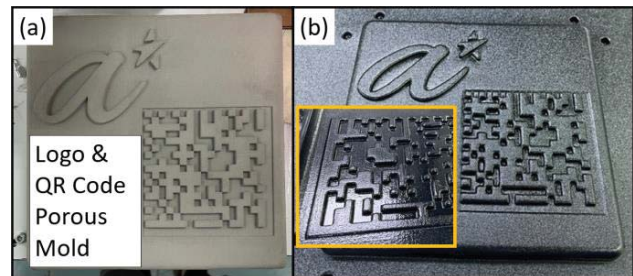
The *Logo & QR Code Mold (Porous)* is shown in (a). (b) illustrates the formed part using the mold in (a); the inset reveals the underside of the formed QR code feature.
